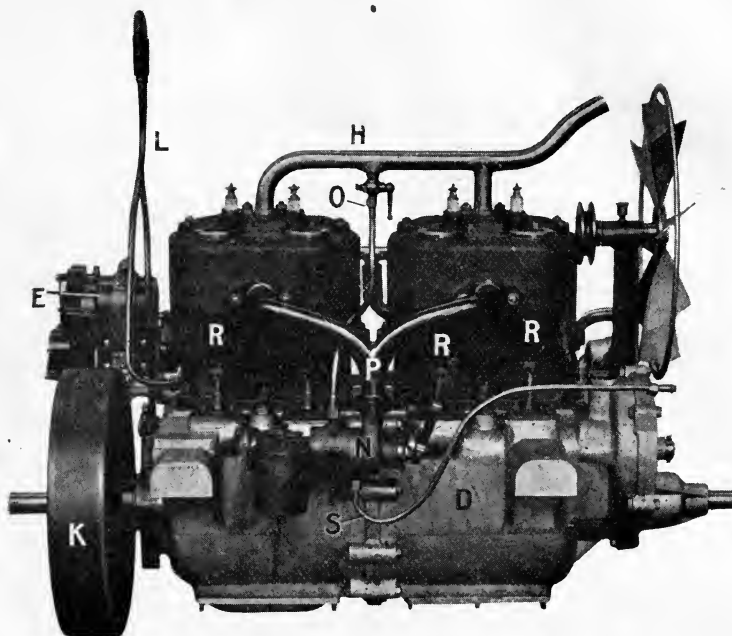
FOUR-CYLINDER ENGINE WITH MAGNETO IGNITION.
